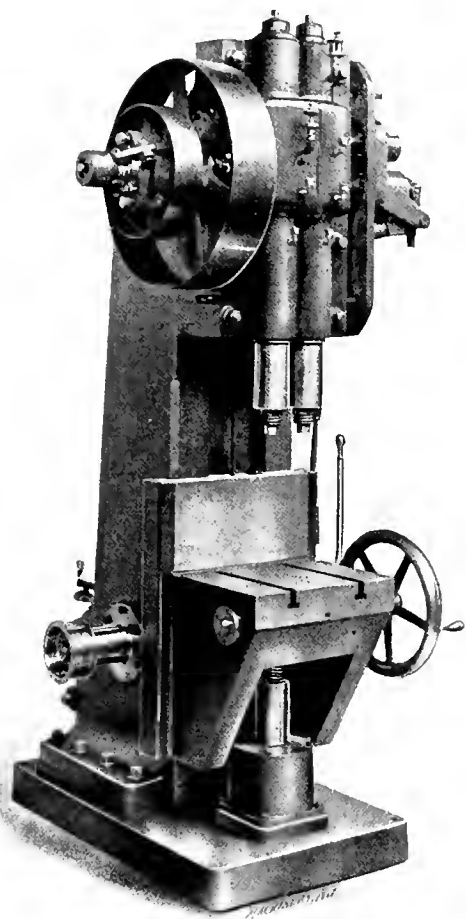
Baker Two-cylinder Automatic Cylinder Boring Machine
